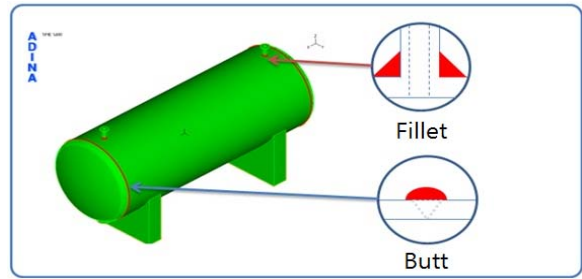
Pressure vessel dimension with (a) fillet and (b) butt weld shapes.
